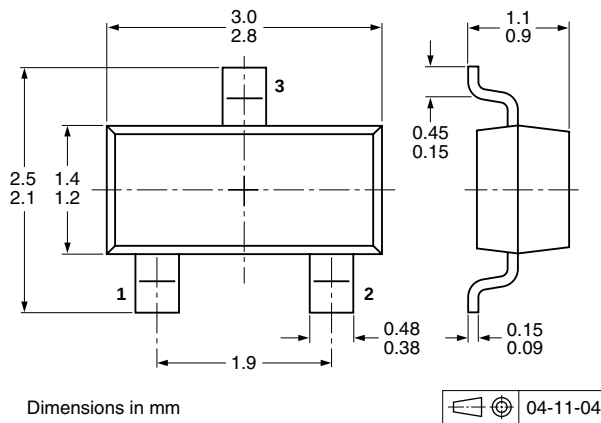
Package outline BAV99 (SOT23/TO-236AB)
